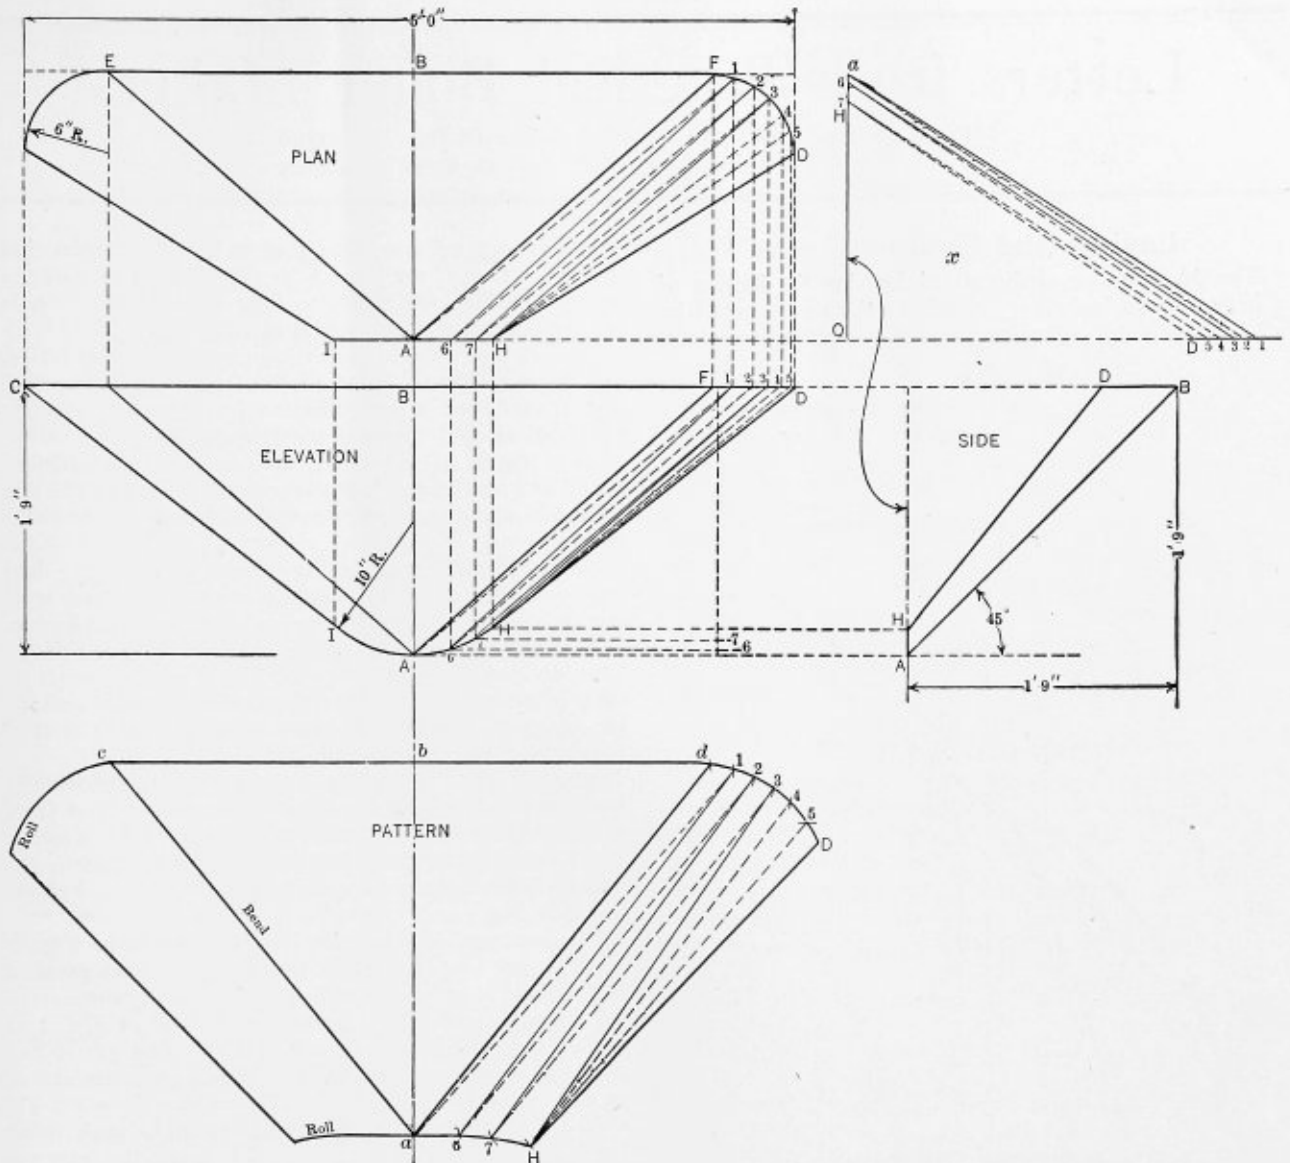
Development and Pattern for Hopper Spout of Concrete Mixer
